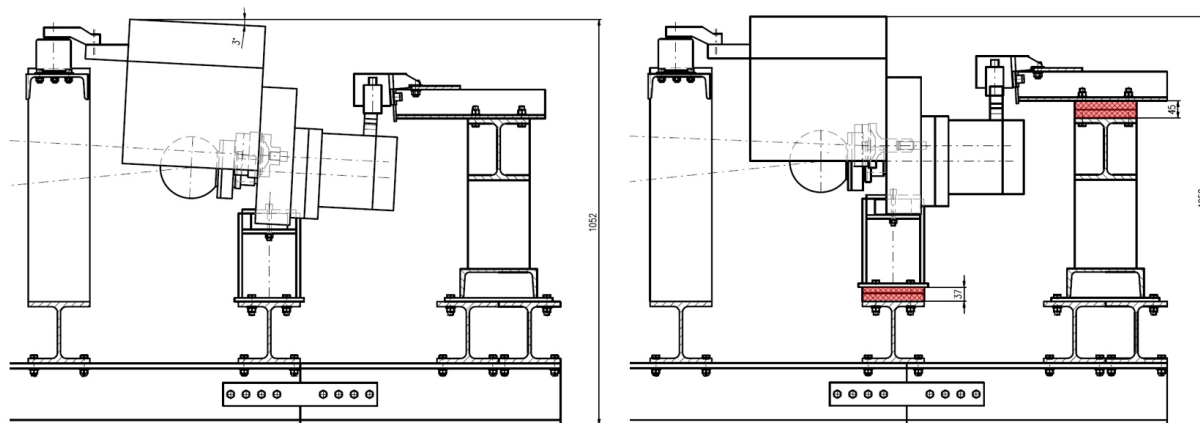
Original (left, 3° inclination) and new (right, horizontal) gearbox position in the test bench to decrease the joint angle at output shafts
